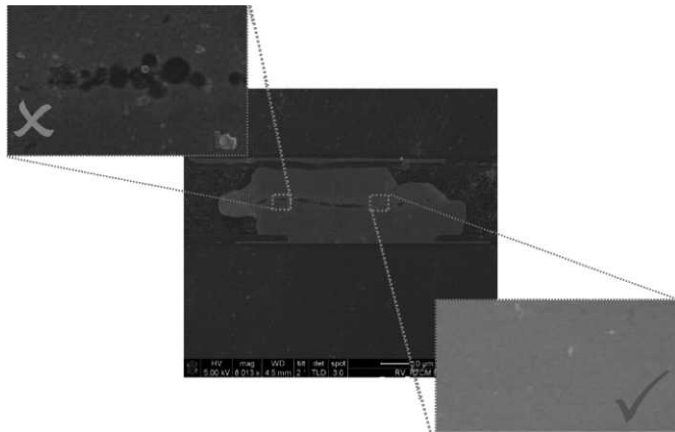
Example of UF filler entrapment between bumps of stacked dice. Top left picture indicates areas with entrapped filler, while the bottom right picture shows area filler-free.
